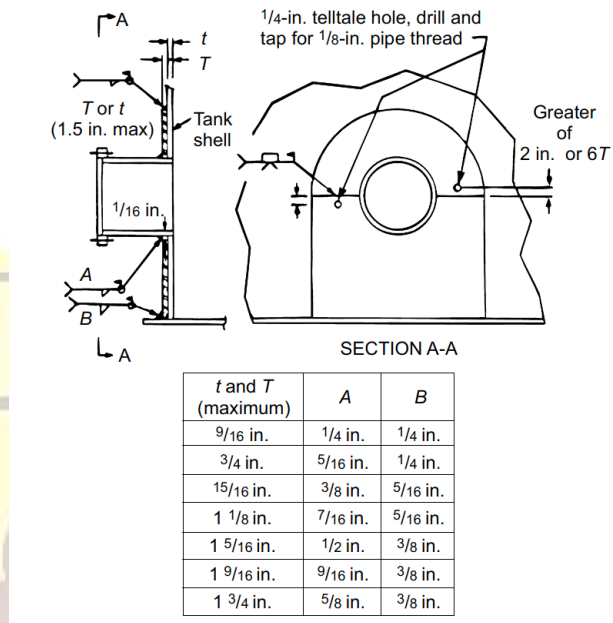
Typical Details for Addition of Reinforcing Plate to Existing Shell Penetration
